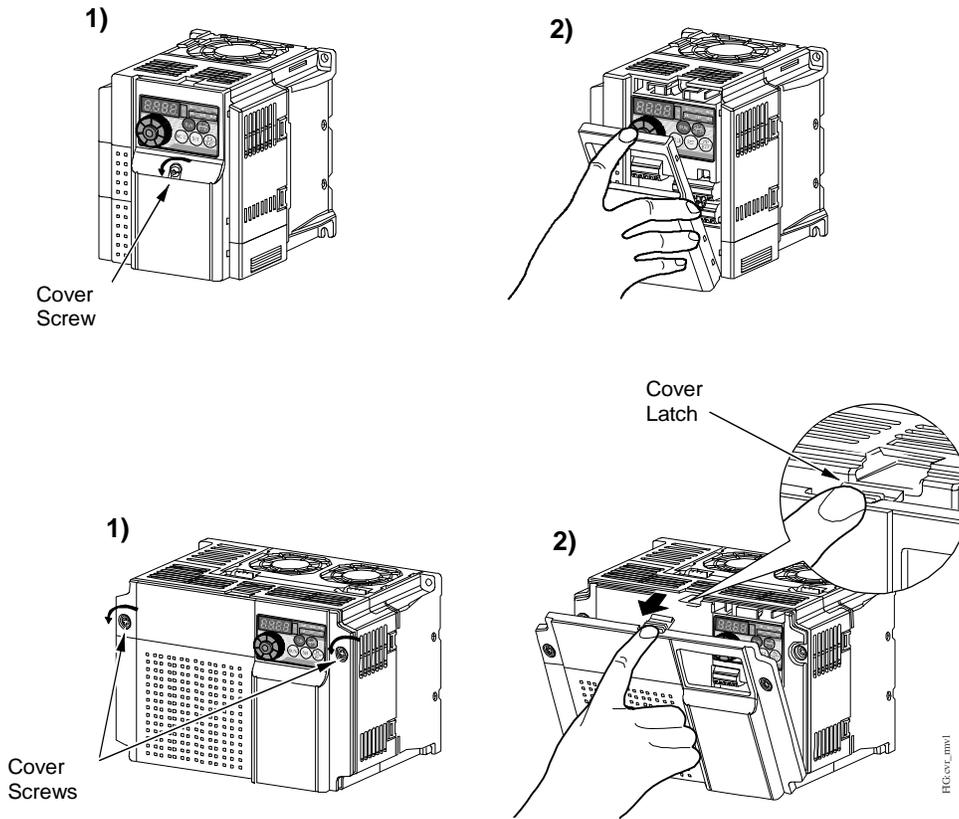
Loosen the Cover Screws and Remove the Front Cover
